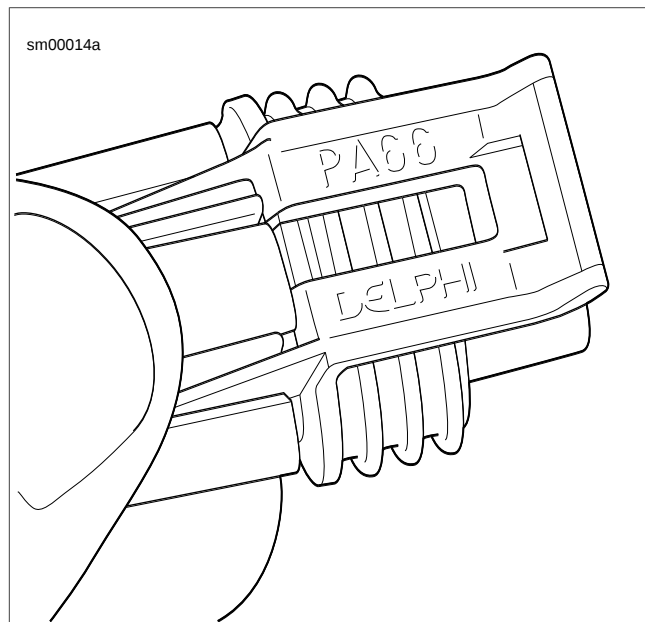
Delphi GT 150 Sealed Connector: Socket Housing Latch
